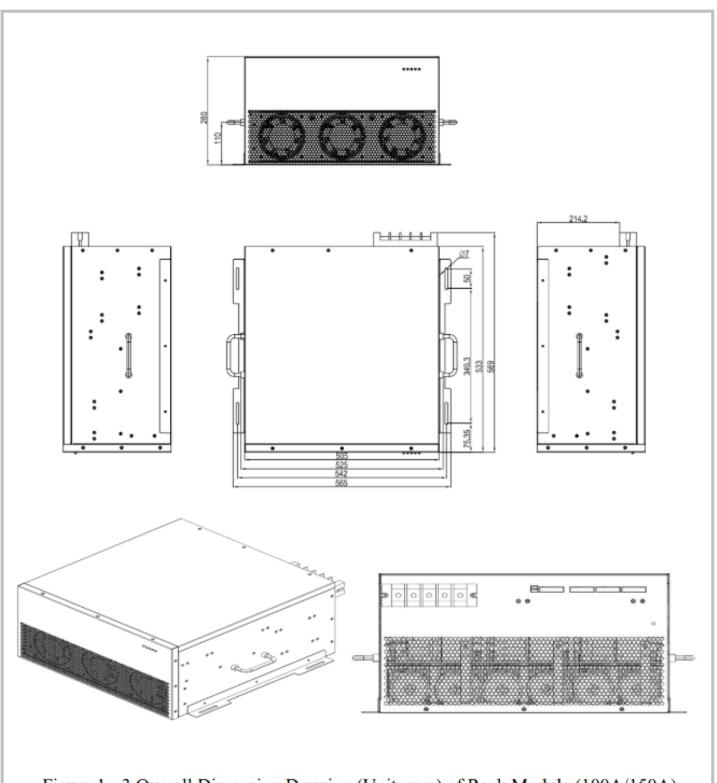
3 Overall Dimension Drawing (Unit: mm) of Rack Module (100A/150A)
